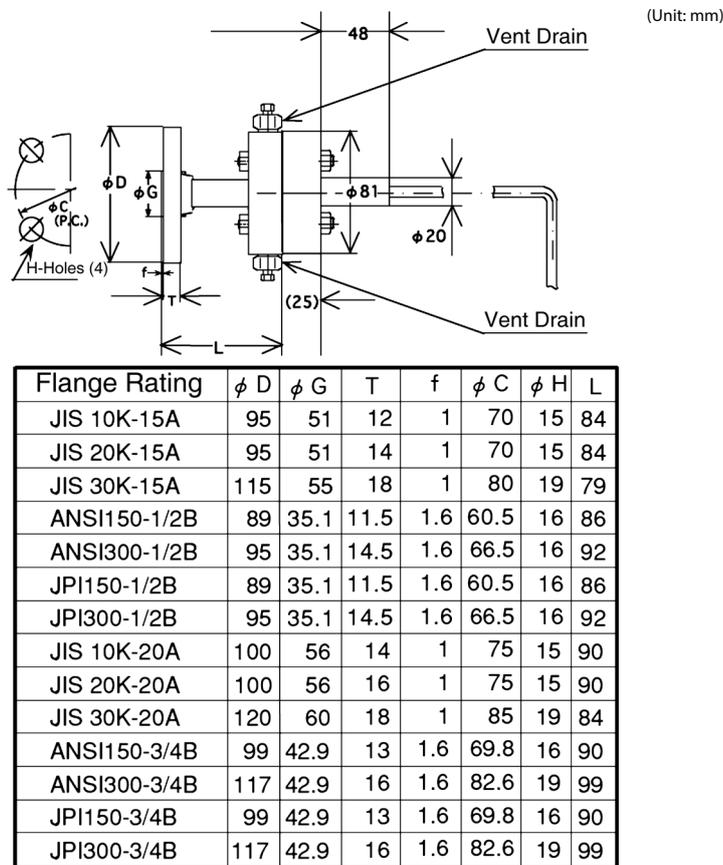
1/2B Remote Adapter Assembly Diagram and Dimensions
